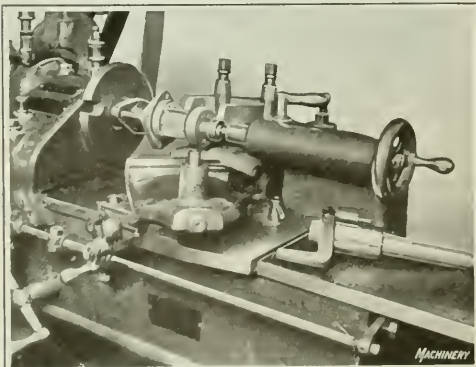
Multiple Facing Operation on the Drive Shaft Bearing Retainer Casting
